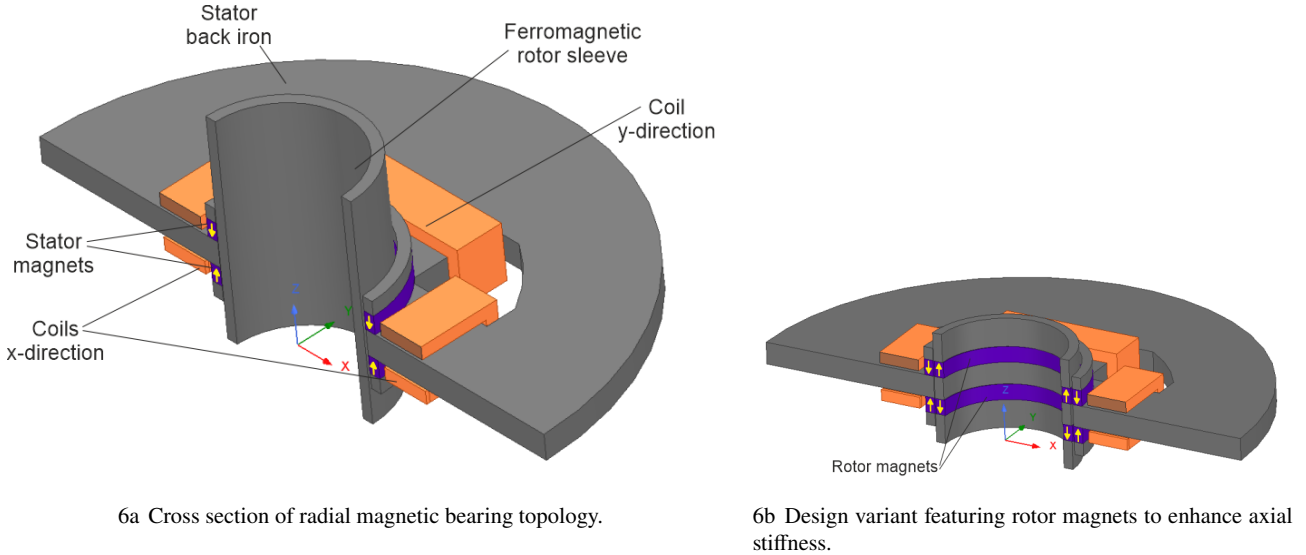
Solutions for radial magnetic bearing without and with rotor magnets
